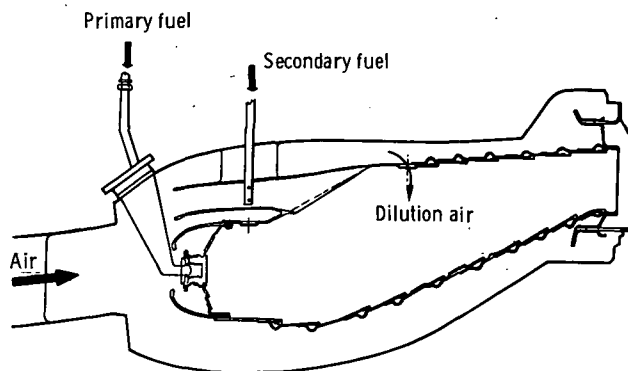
Radial/axial staged combustor for CF6-50 engine.
